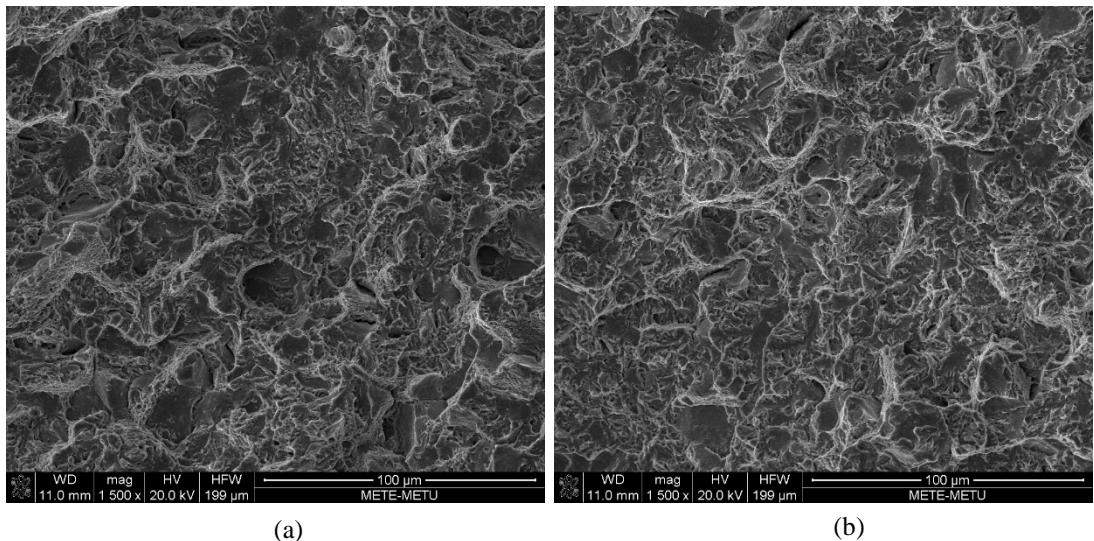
Fracture surfaces of the tensile test specimens quenched and tempered at 450°C, 1.5hr.
